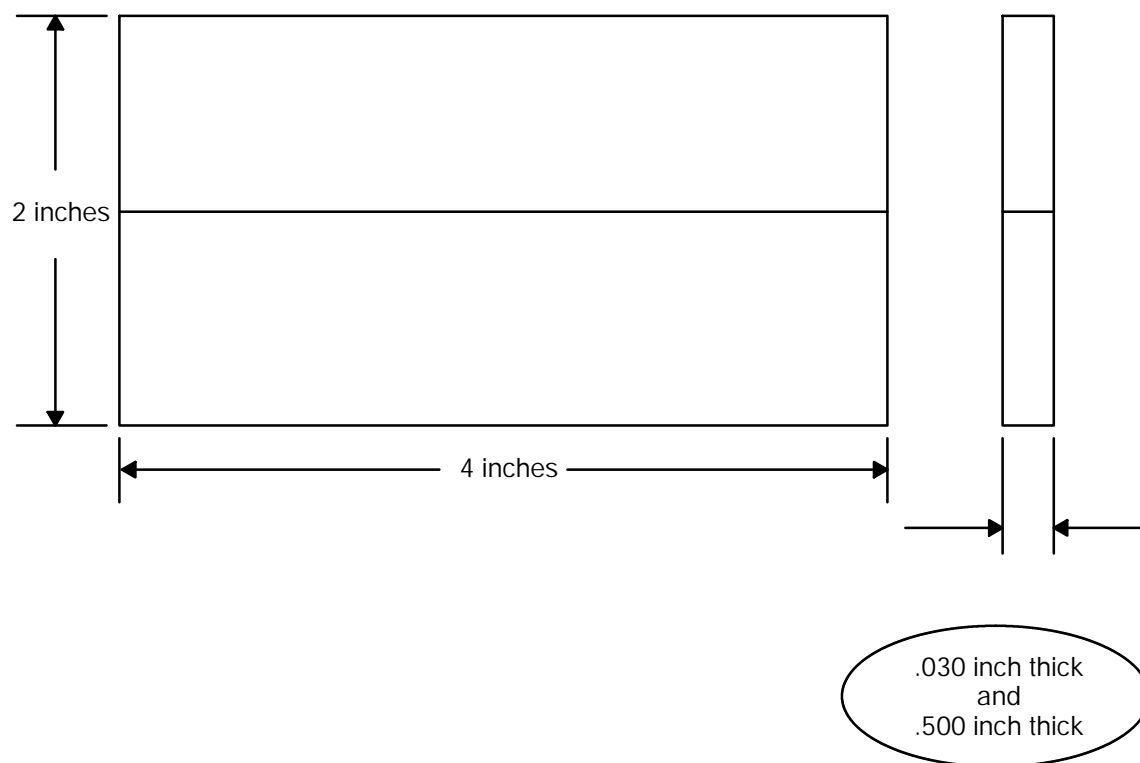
Butt Weld Specimen (Electron Beam Welding)
